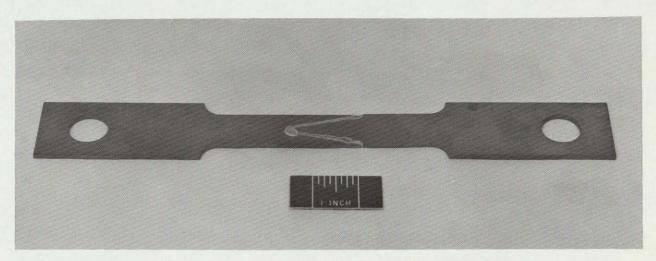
TAPERED FINGER JOINT SPECIMEN
